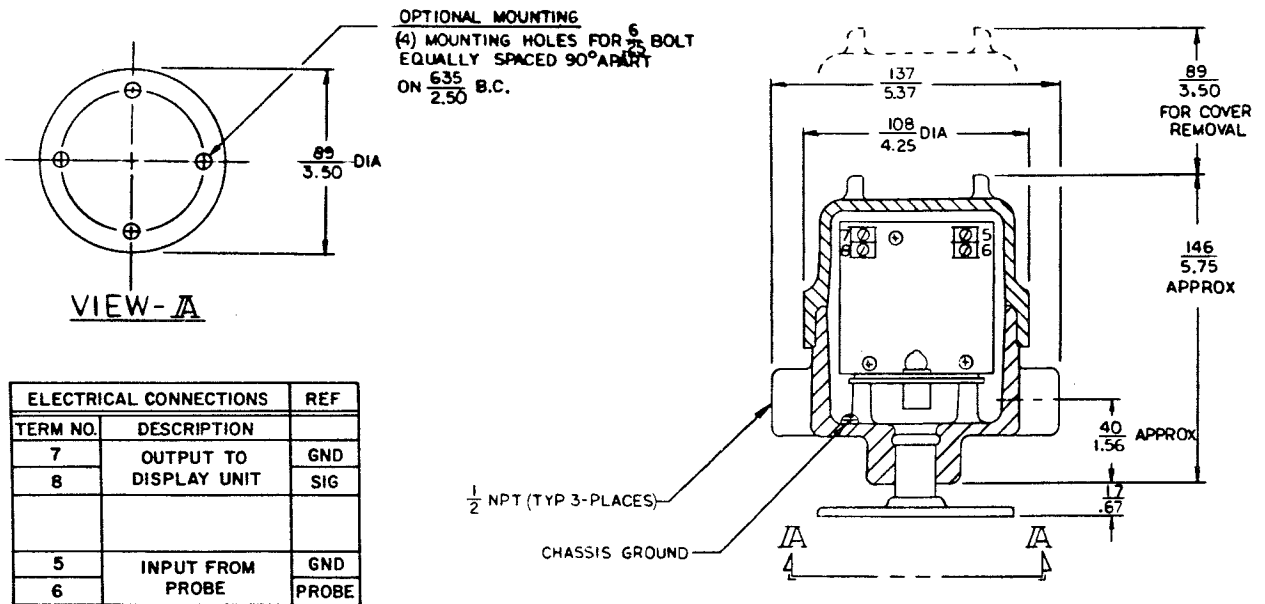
Mounting Dimensions and Electrical Connections, Probe Mounted PFM Transmitter.
